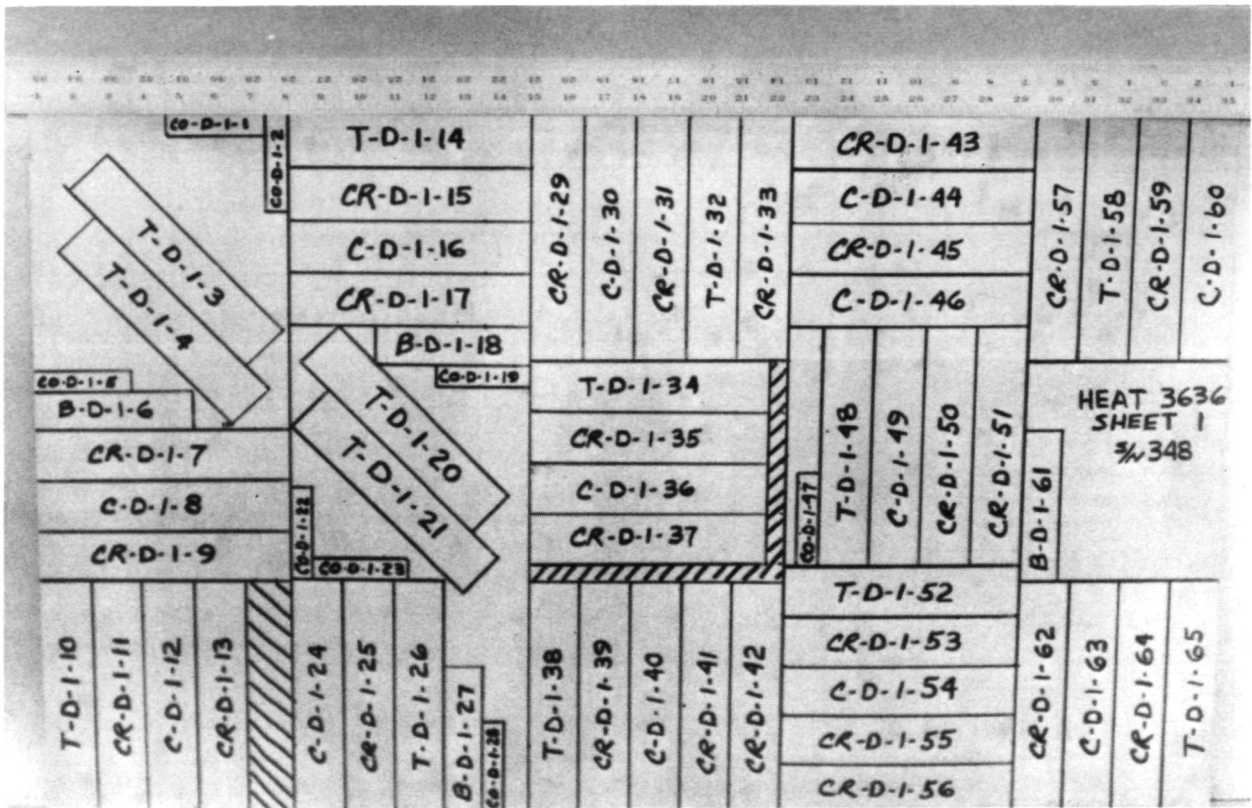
Typical Specimen Layout, Heat 3636, Sheet 1, S/N 348.
